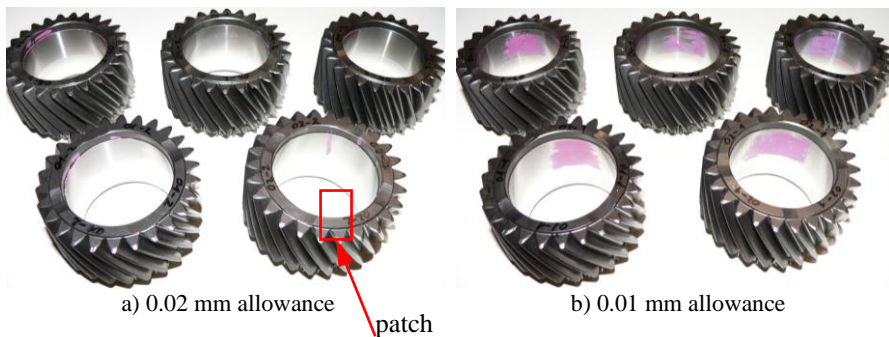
In the 4th allowance group (a) one workpiece and in the 5th (b) all workpieces had one or more patches
